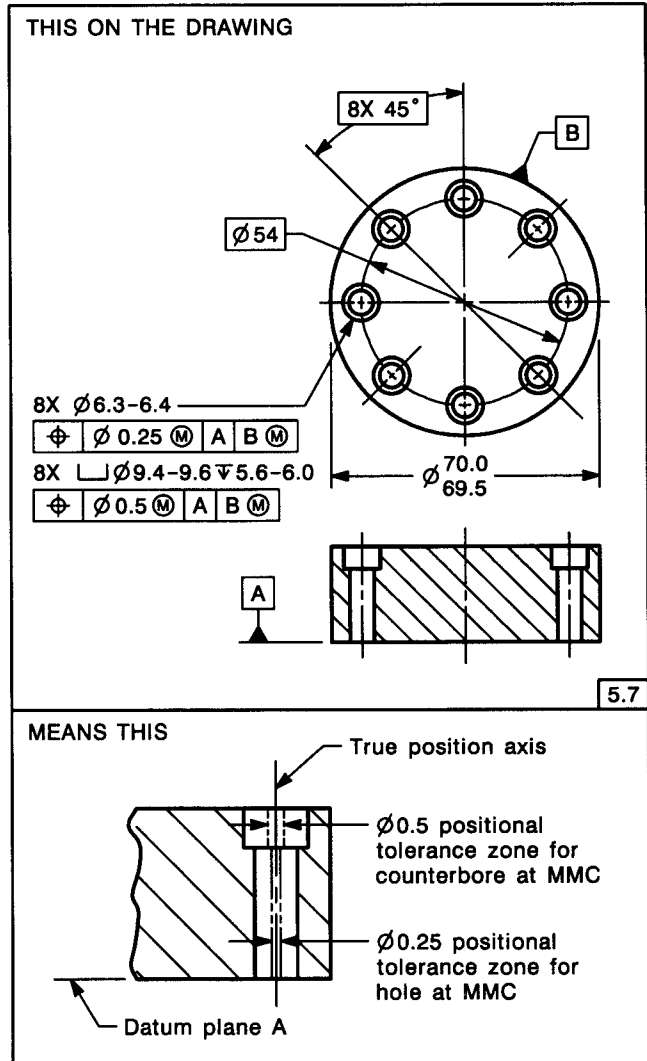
DIFFERENT POSITIONAL TOLERANCES FOR HOLES AND COUNTERBORES, SAME DATUM REFERENCES
